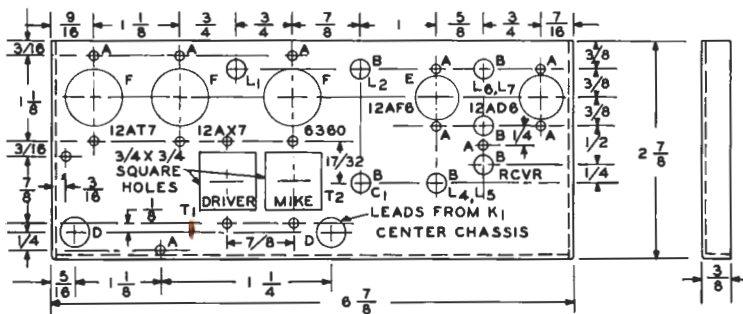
DRILLING DIAGRAM for the center chassis. All holes sizes identified on the diagram by letter are given in TABLE II. Over-all size of the aluminum sheet should be $7\frac{3}{4} \times 3\frac{5}{8}$ inches, to allow for the $\frac{3}{8}$ -inch wide lips, plus bends.
